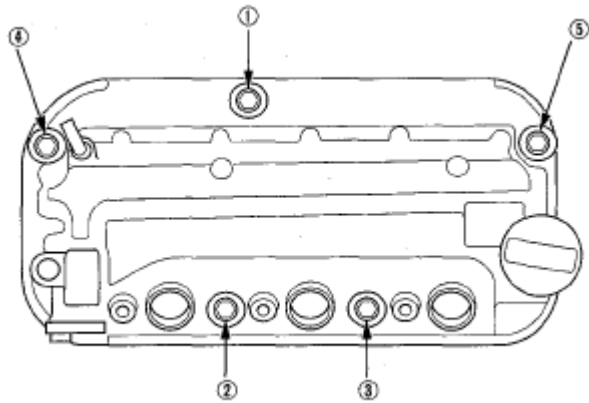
Identifying Front Cover Tightening Bolts Sequence
